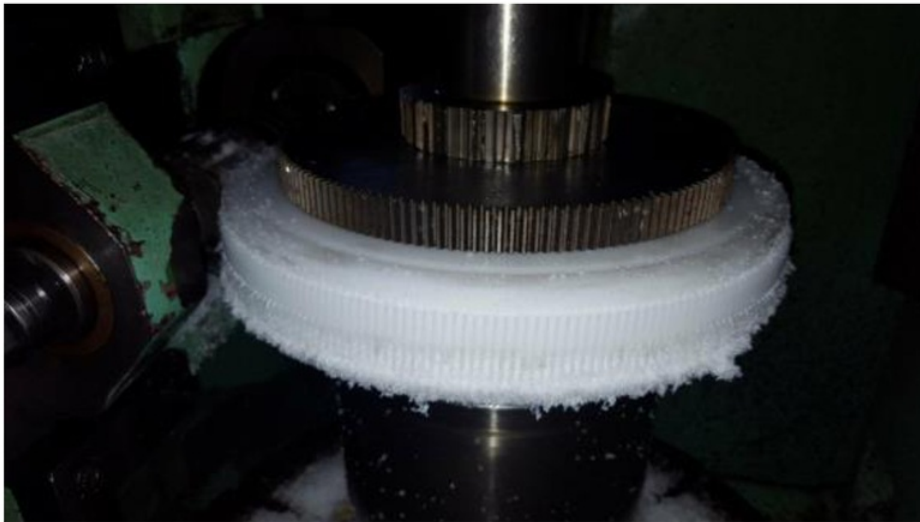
Driven gear tooth shape while cutting them in the hobbing machine.
